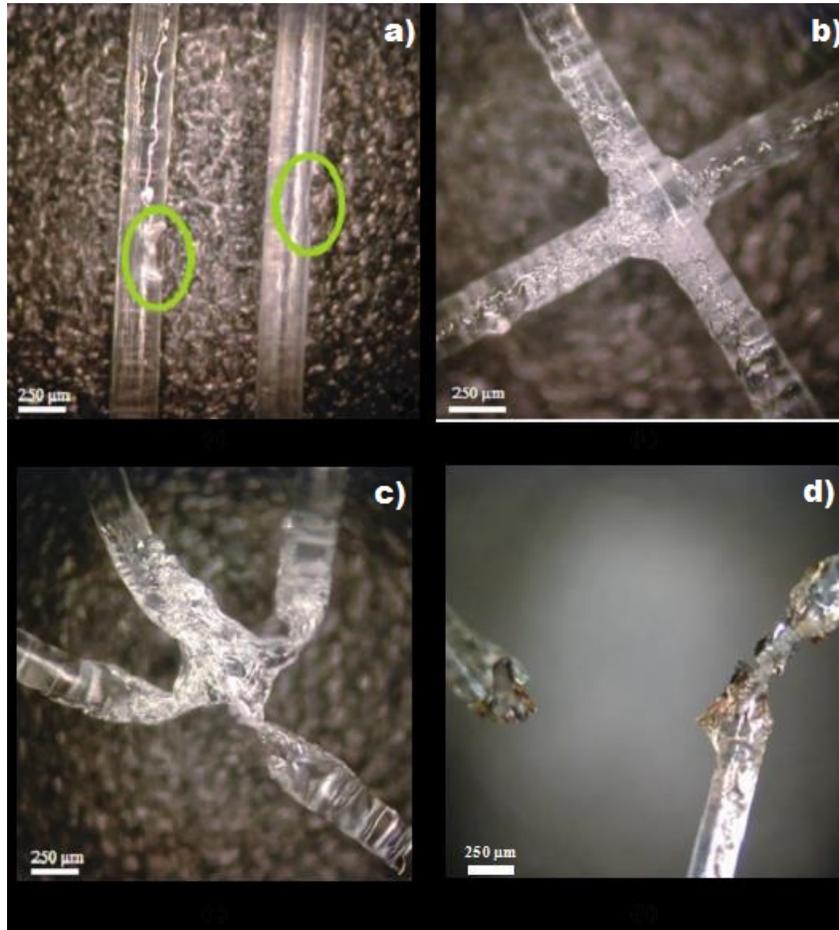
Examples of fiber-fiber welding with a toner. (a) insufficient laser power, leading to poor adhesion; (b) strong weld; (c) and (d) fiber damage resulting in poor weld strength.
